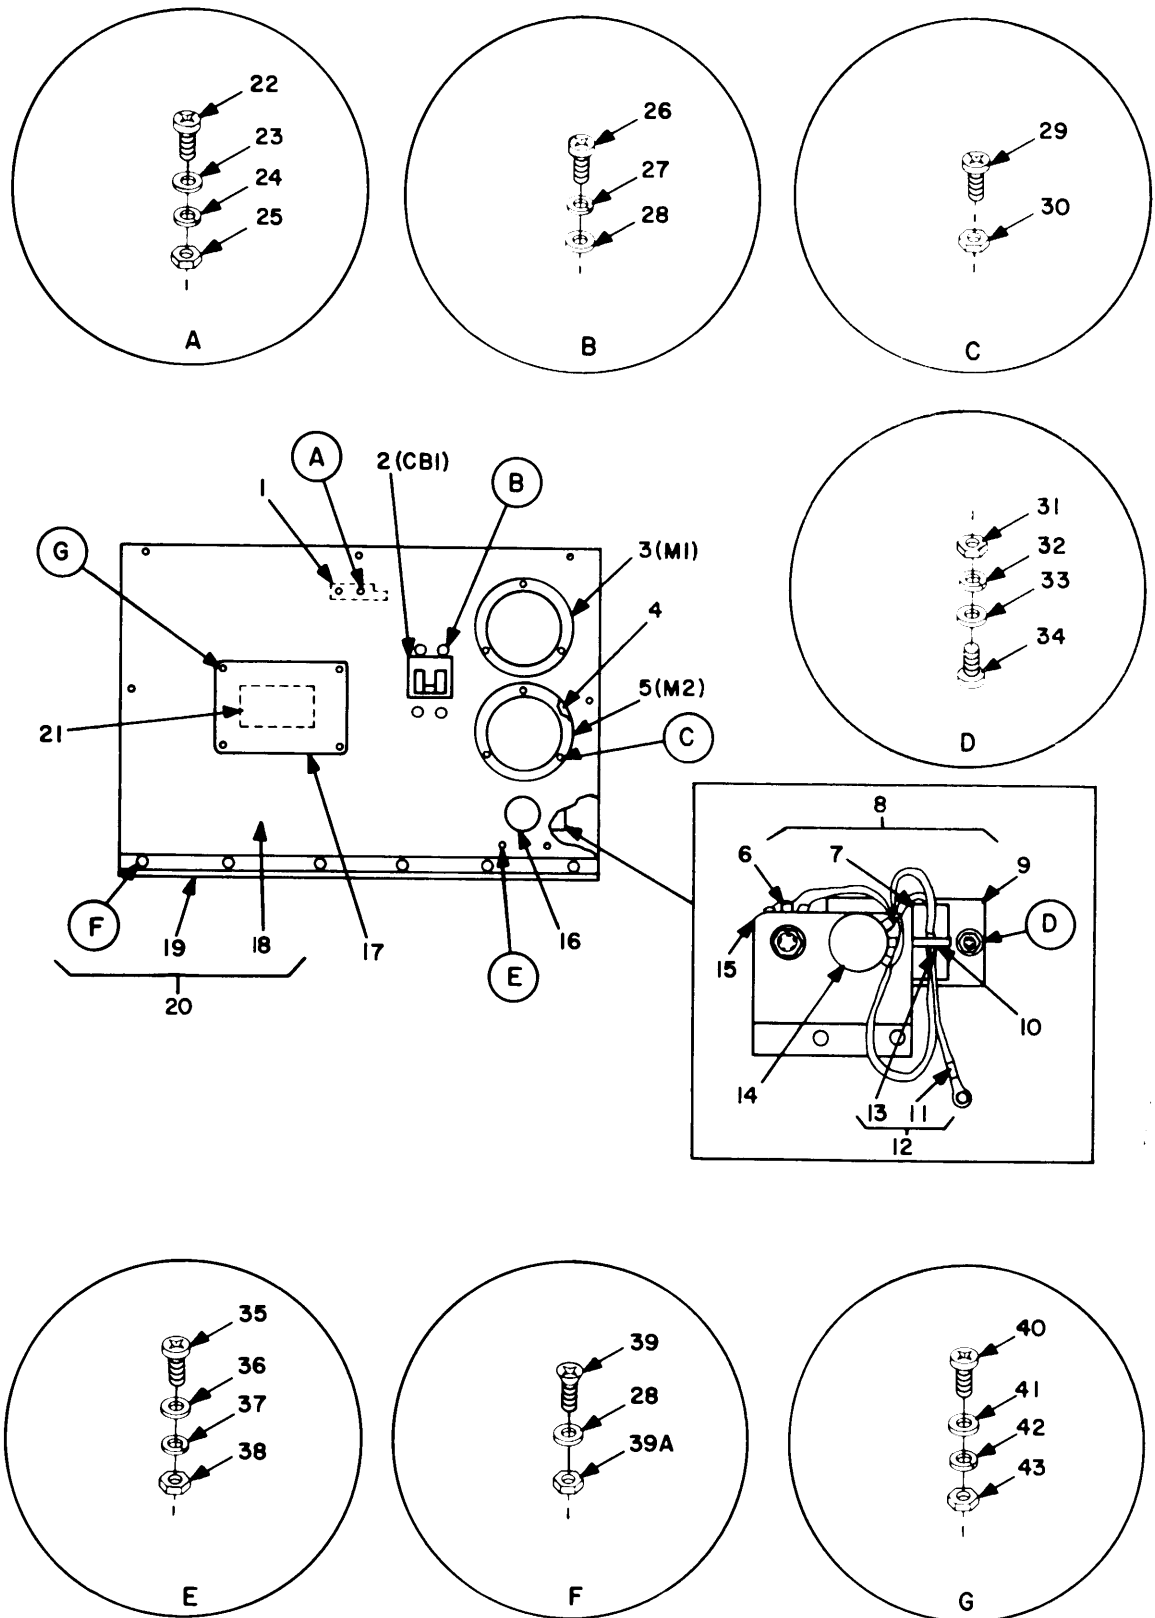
Power supply PP-4763/GRC and PP-4763A/GRC, front panel assembly.
